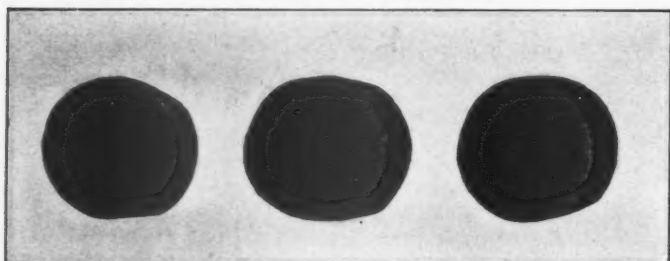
FRACTURE OF TENSILE TEST BARS HELD PERPENDICULAR TO AXIS OF LENS
